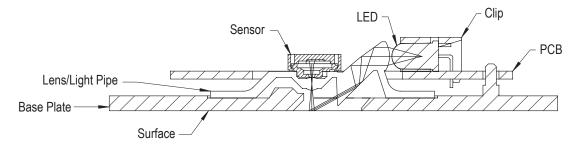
Sectional view of PCB assembly highlighting all optical mouse components (optical mouse sensor, clip, lens, LED, PCB, and base plate).
